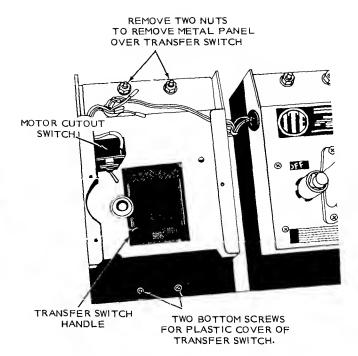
TRANSFER SWITCH WITH GEAR AND DRIVE ASSEMBLY REMOVED
